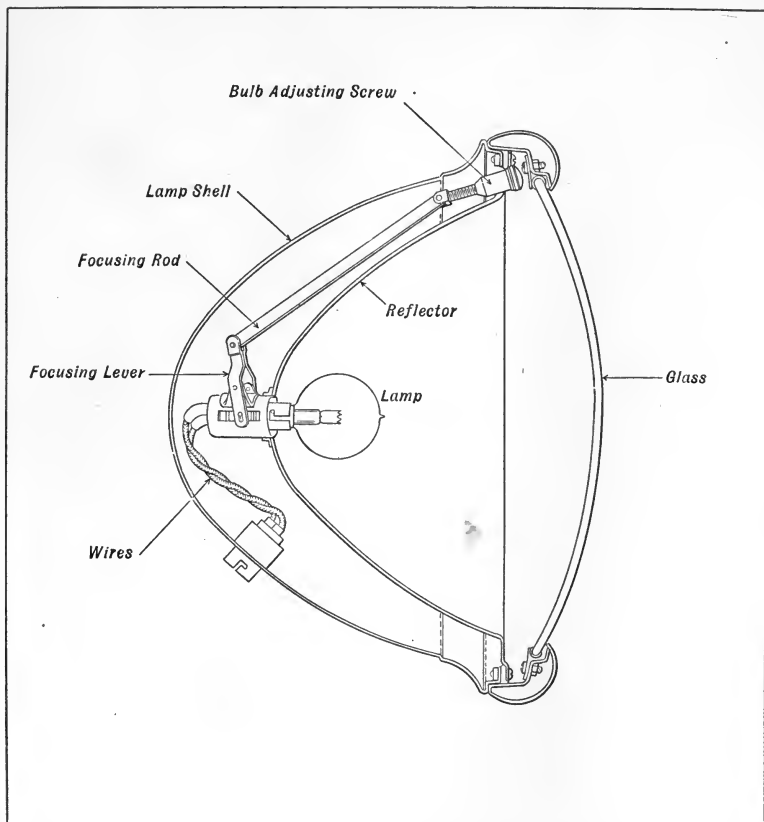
Sectional View of Gray & Davis Electric Headlight Showing Method of Focusing Bulb by Accessible Adjusting Screw.
